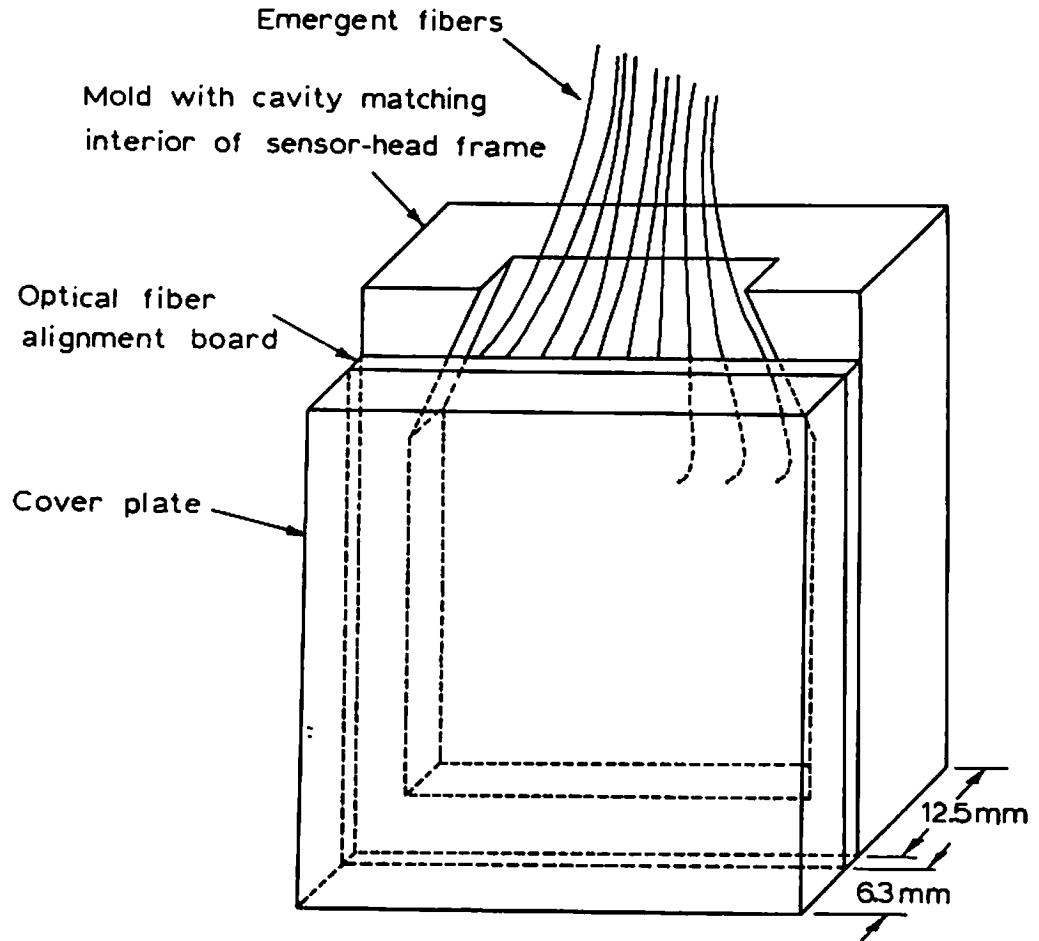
Polyethylene jig for bending and encapsulating the plastic optical fibers during fabrication of the TSA head.
